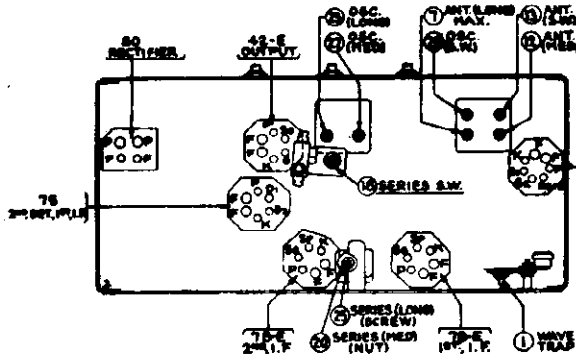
View of Tube Sockets and Compensating Condensers underneath Chassis.
